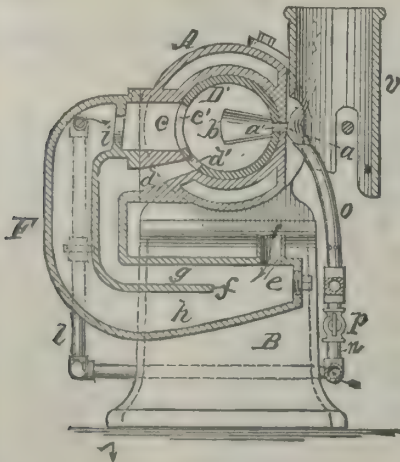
SECTIONAL VIEW OF GAS ENGINE.
